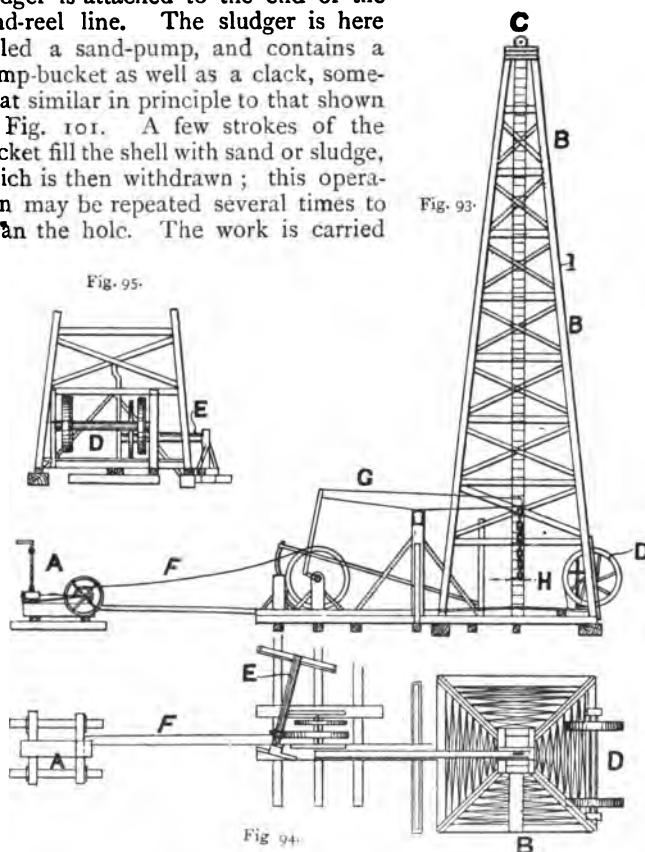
American rope-boring: side elevation. A, engine; B, pulley frame; C, pulley; D, Bull-wheel; E, sand-line reel; F, driving belt; G, Boring-beam; H, cross-head; I, rope. FIG. 94.—Horizontal projection. FIG. 95.—End elevation.
